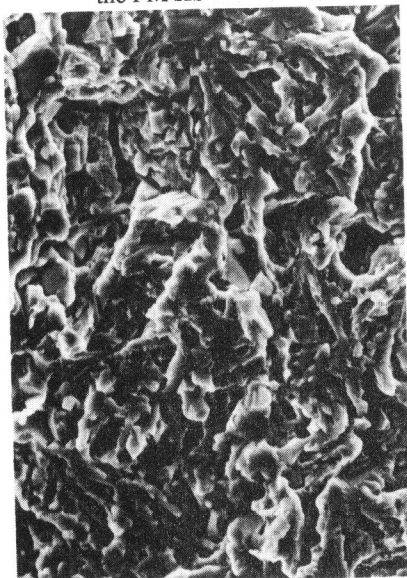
Fracture surface of the conv. HS Steel (x 1520)
